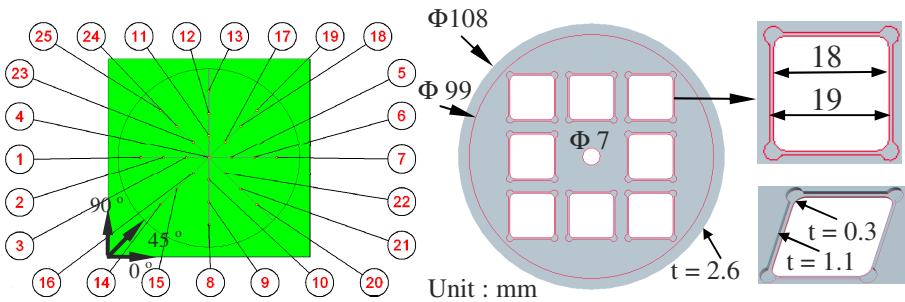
The measurement points (left), geometry and dimensions (right) of the stainless product
